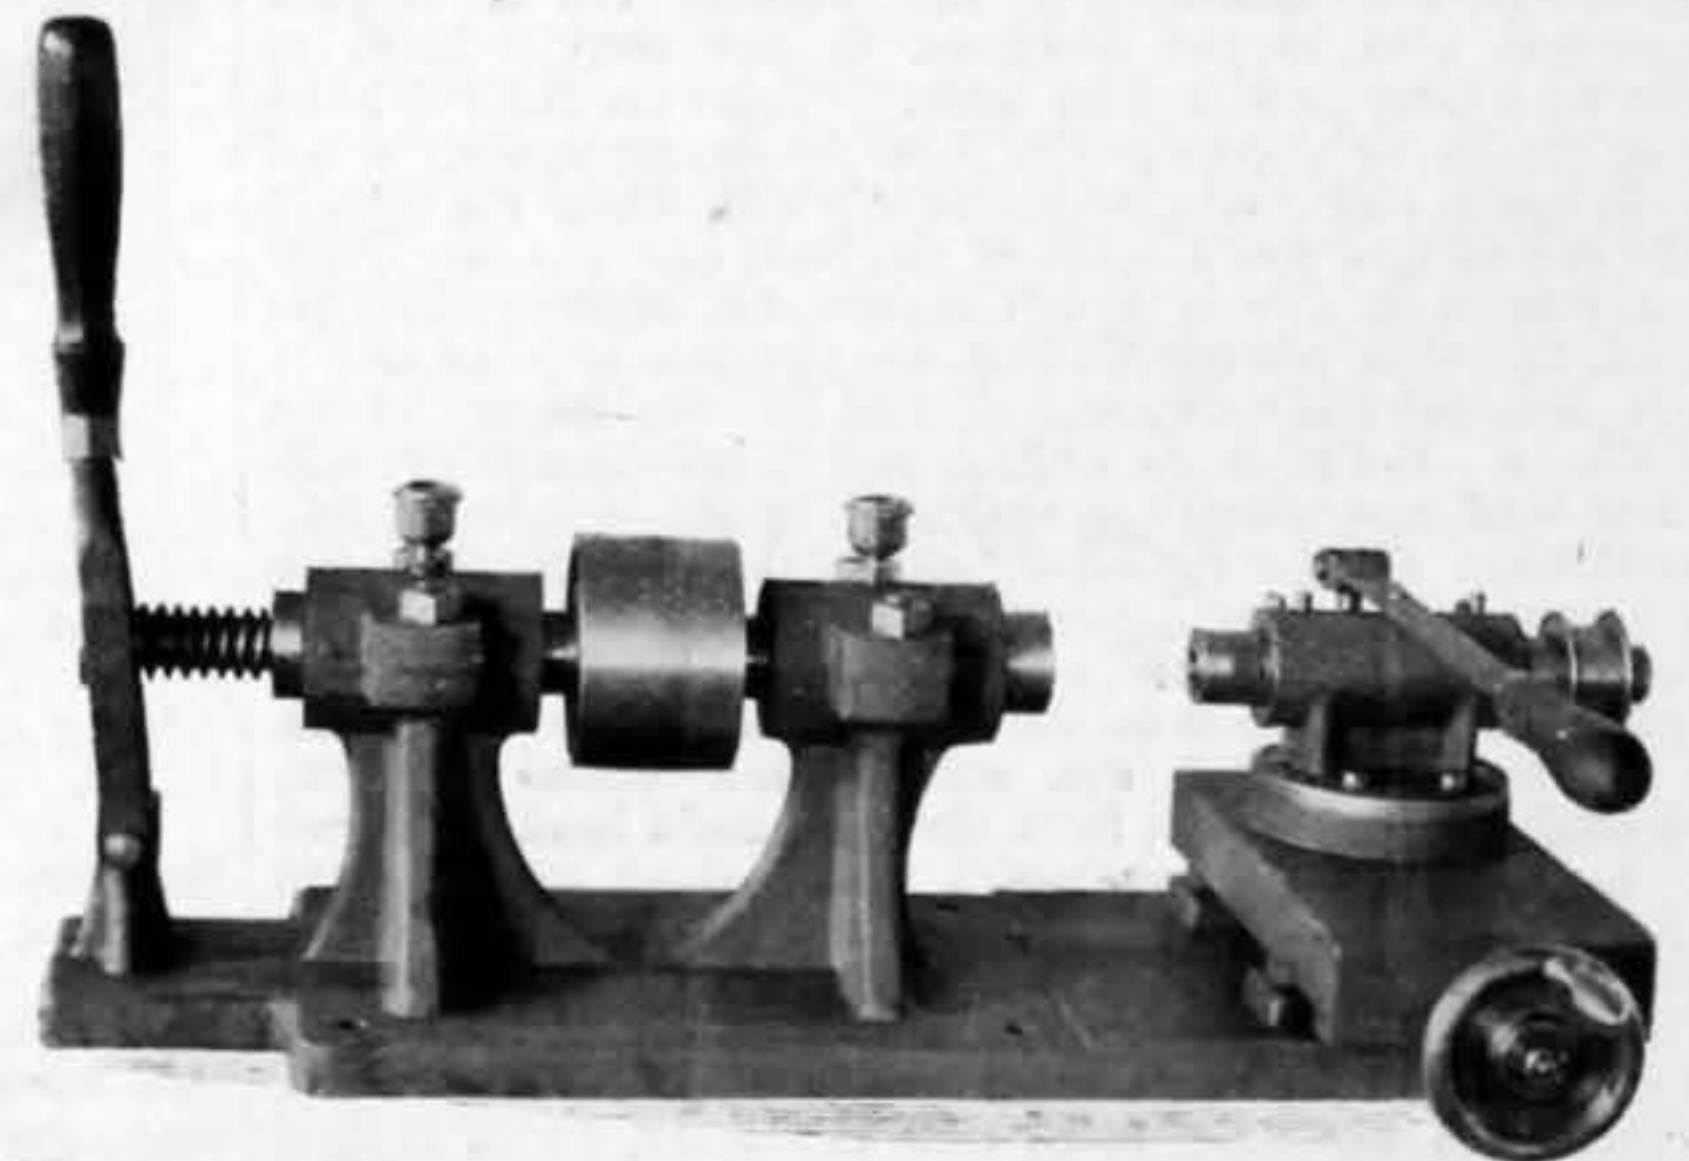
MESSRS. SELIG, SONNENTHAL, AND CO.—SPOKE SCREWING MACHINE AND STANDARD INSIDE GRINDING MACHINE—Fig. 7
